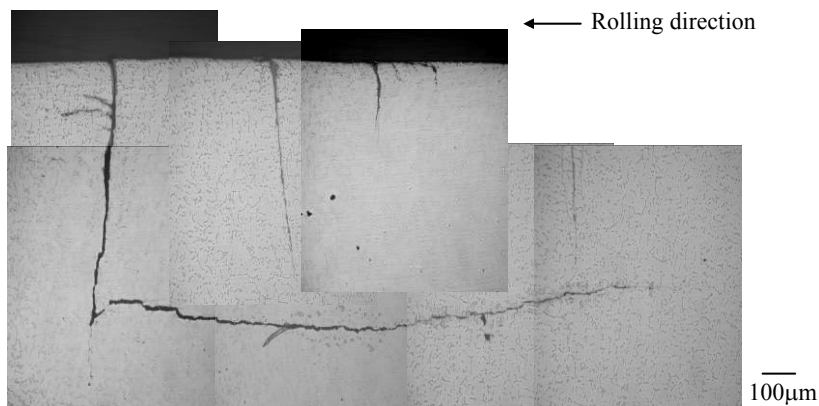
shows the small spalling which exists on the hot rolling mill roll surface after  $1.75 \times 10^5$  cycles. The roll diameter is 410mm. The finish processing of the roll surface was carried out by a grinding machine and surface roughness of the roll was  $Ra\ 1.0\mu\text{m}$ .
